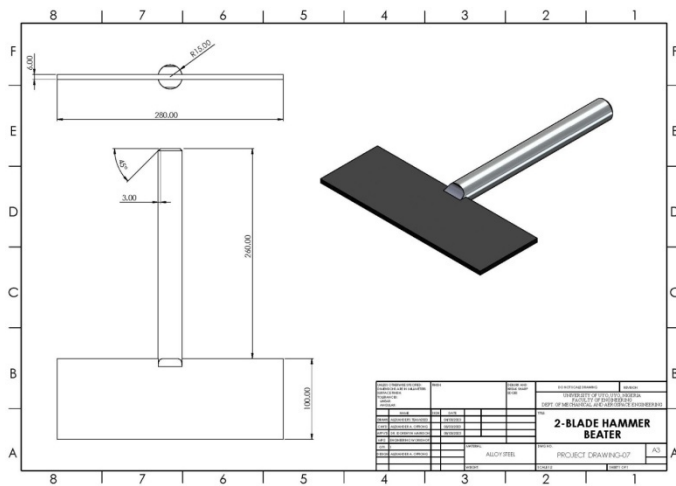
Components drawing the palm kernel nut cracking machine [Two Blade Hammer Shaft]
